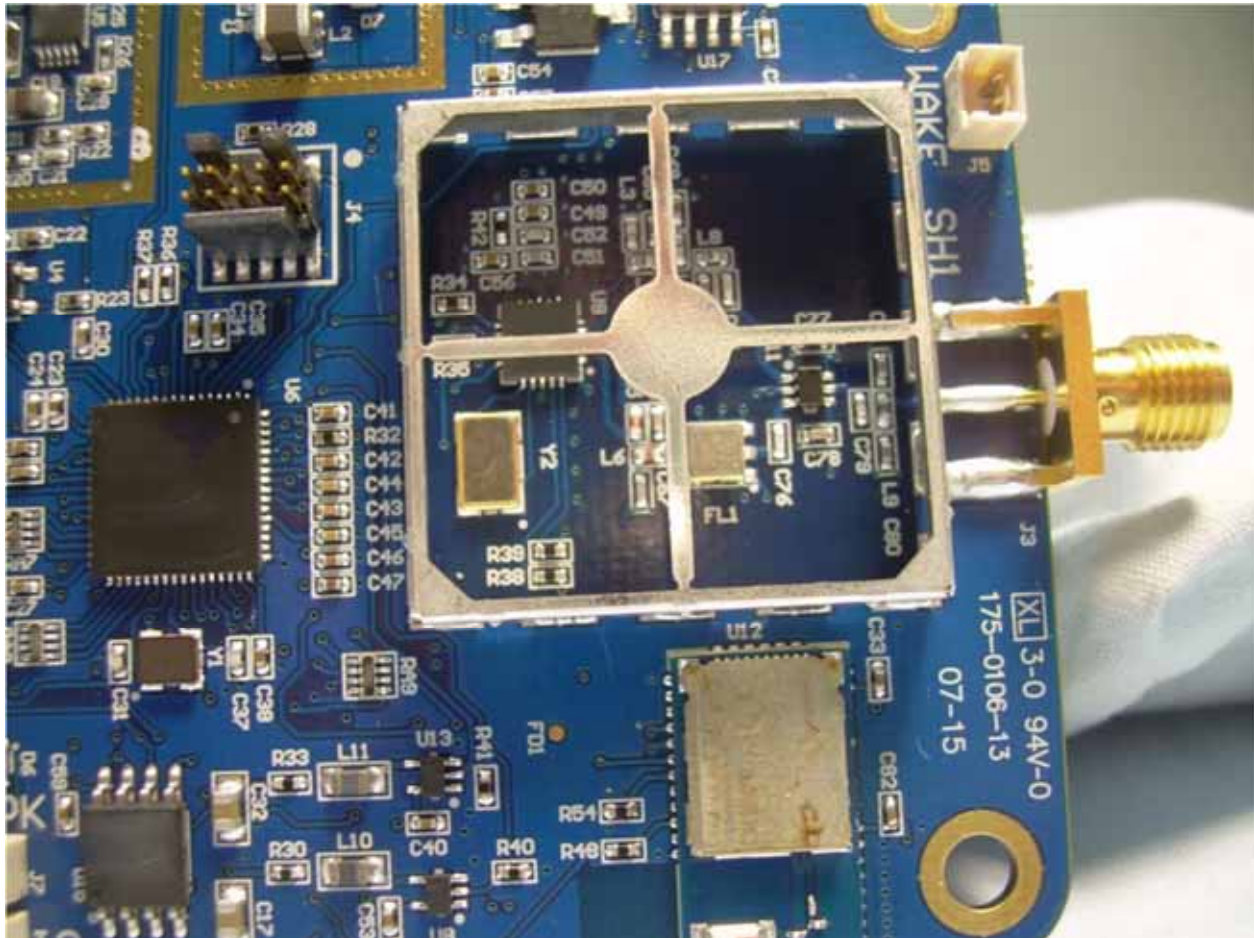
View of the Top Side of the Main PCB – Batteries Removed
